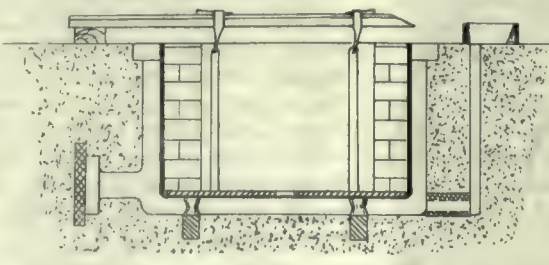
ASSEMBLED SAND MOULD WITH LOAM CORE.
